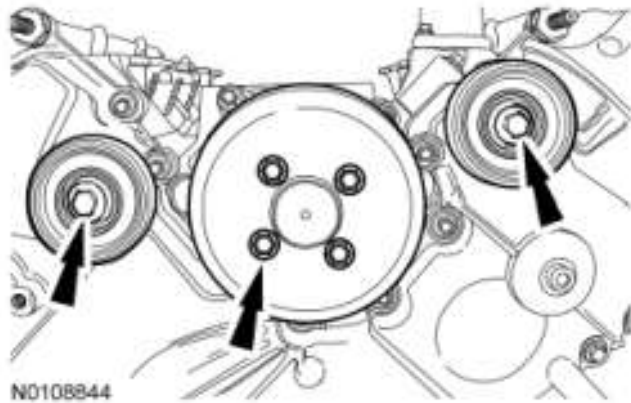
Locating Coolant Pump Pulley, Accessory Drive Belt Idler Pulleys With Mounting Bolts
